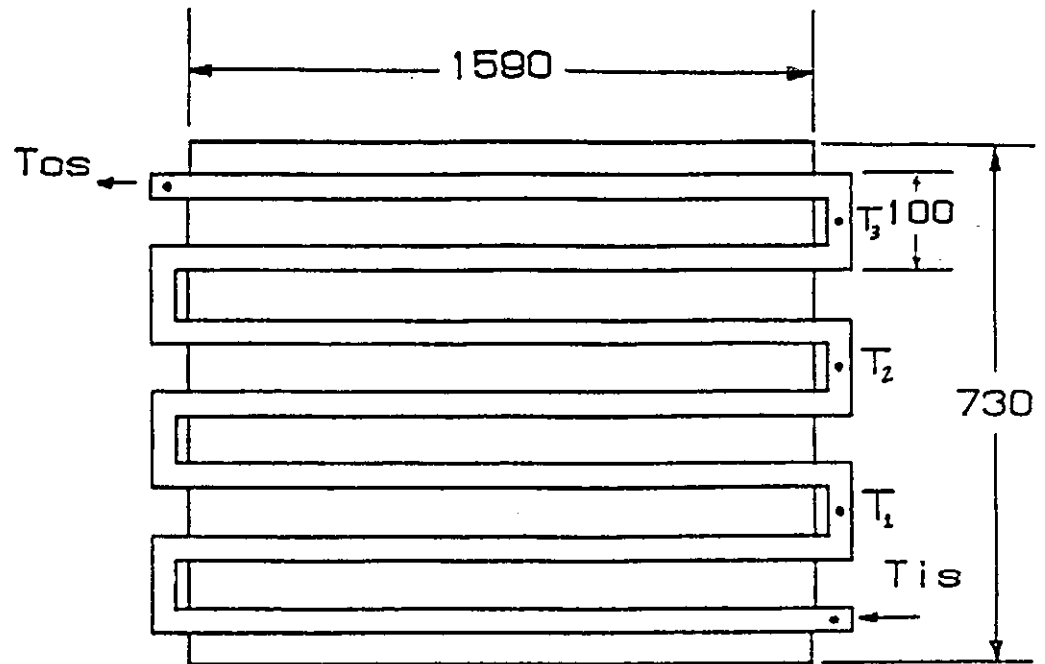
Absorber plate – tubes configuration and thermocouple wires location for the serpentine type flat plate solar collector. All dimensions in mm.
